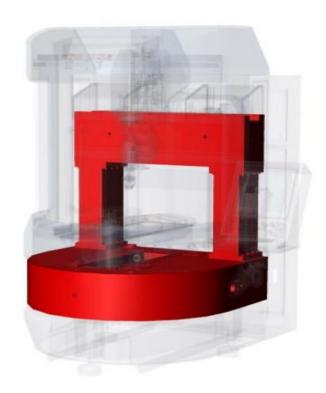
Polymer Granite Base & Welded Steel Frame
